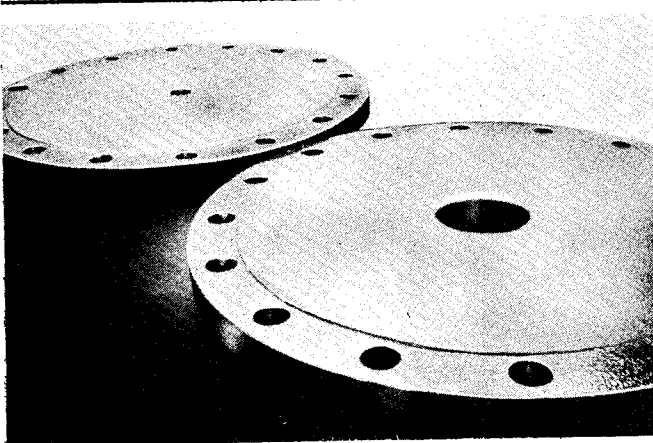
Wet lay-up on 10" diameter flanged end covers [300 p.s.i. rated].
